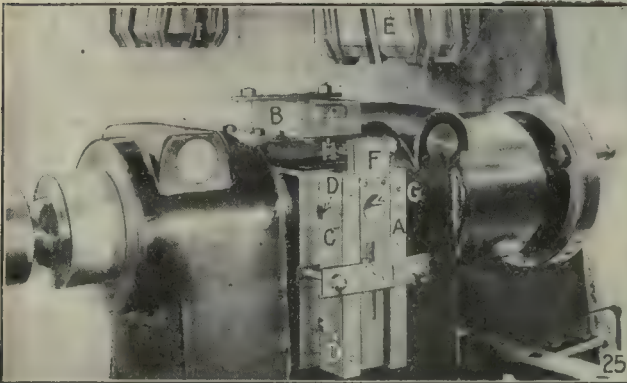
SPECIAL GAGING DEVICE FOR SETTING UP MILLS
